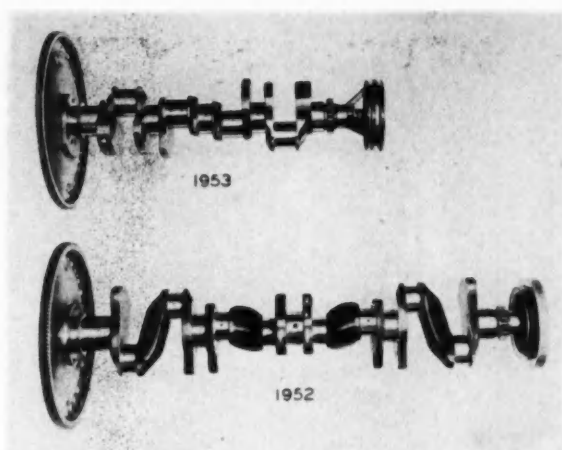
The five-bearing crankshaft weighs only 56 lb—less than half the weight of the crankshaft used in Buick's 1952 straight eight
